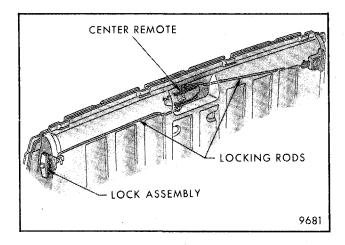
Tailgate Remote Assembly A-80 Style
